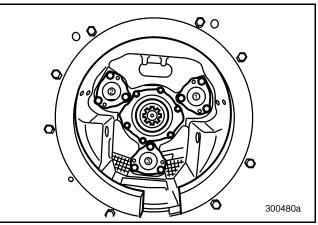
Mark Front Countershaft Front Bearing Covers for Placement
